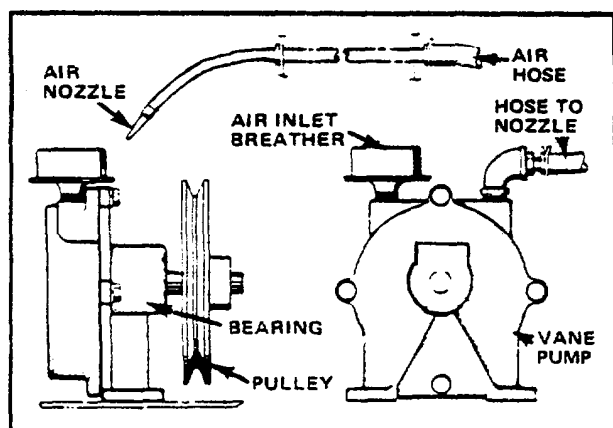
AIR PUMP AND CHIP BLOWER - 3613-20 ONLY. 3812-2 OPTION
